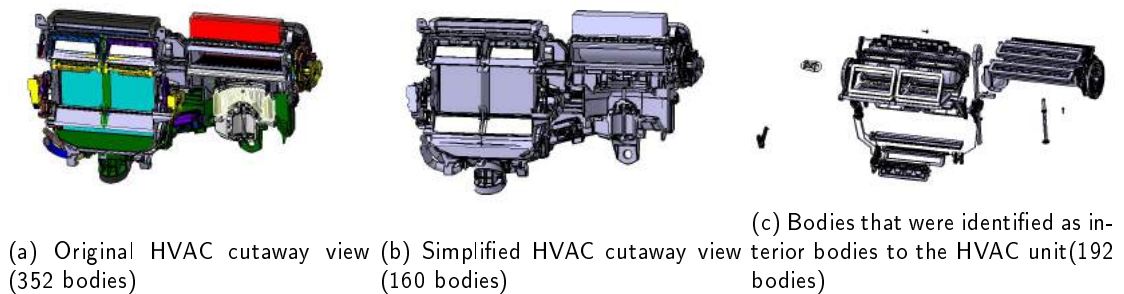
Section views of the original and simplified HVAC unit and the parts that were identified as interior parts.
